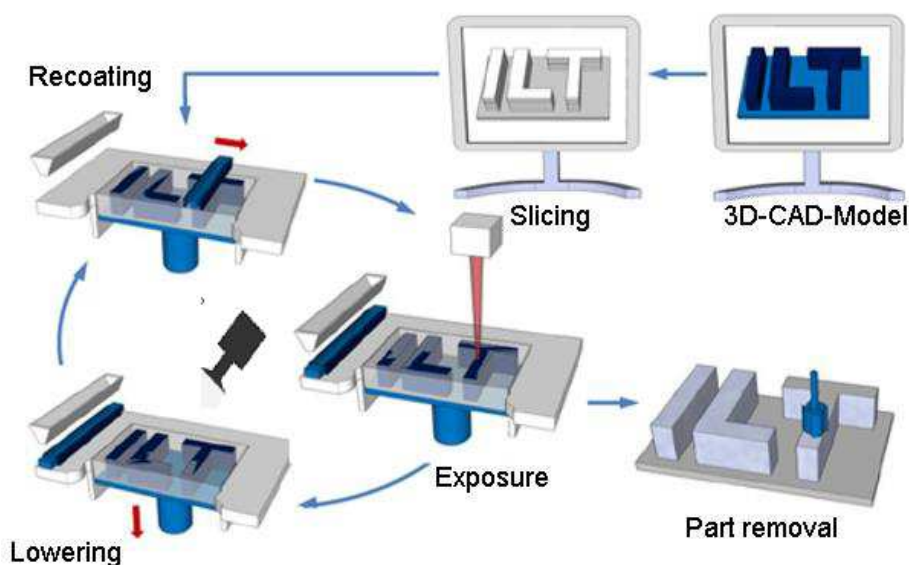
Printing scheme with the location of the measurements in the printing cycle indicated. [3]
